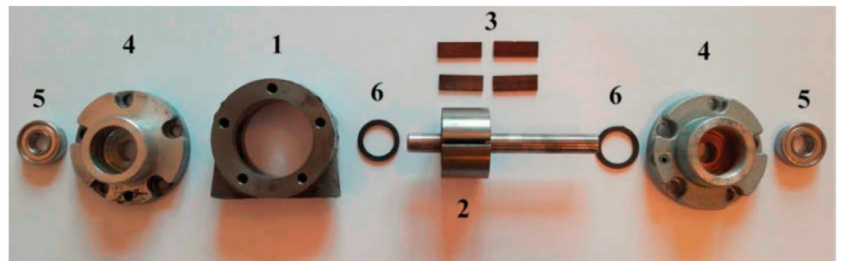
The individual elements of a vane expander: 1—body, 2—rotor, 3—blades, 4—housing, 5—bearings, 6—rings [154].
